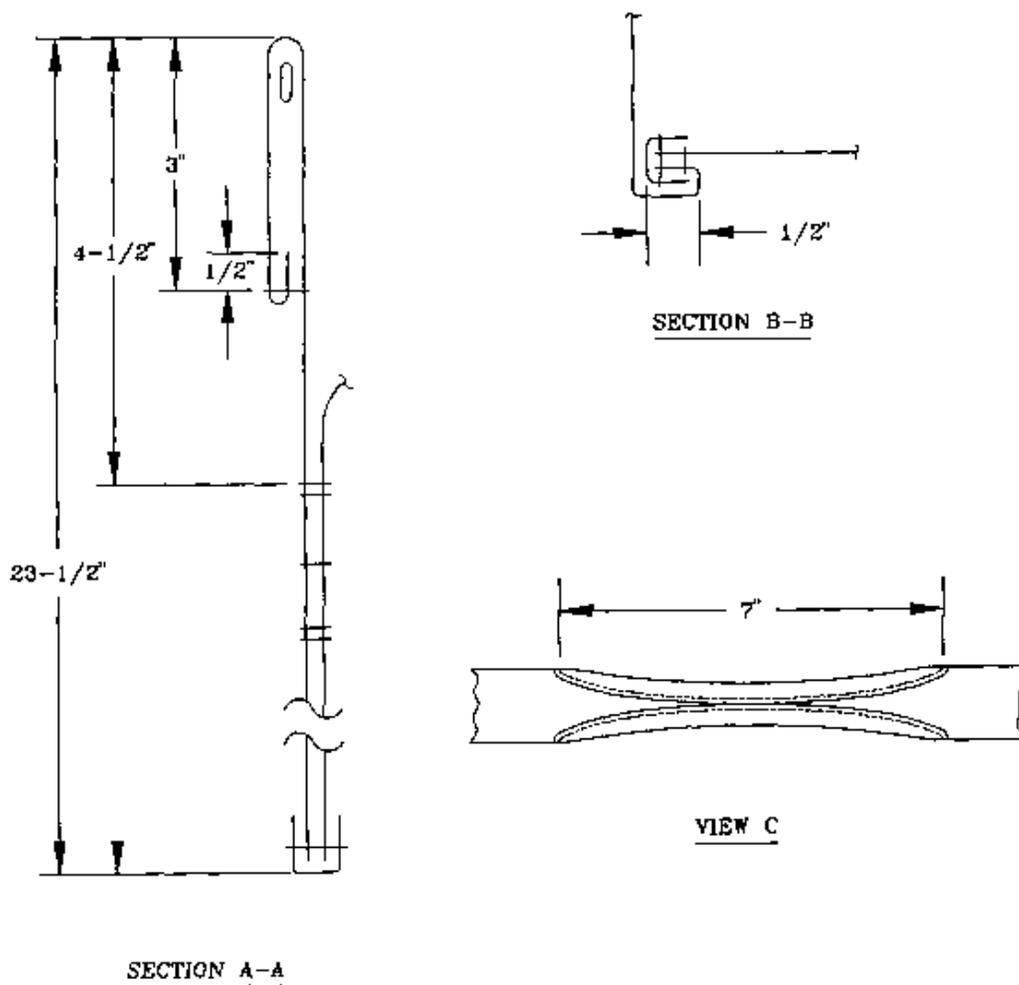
(CONTAINER FRONT MOUNTED) KIT, BAG ASSEMBLY (SHEET 2 OF 2)
